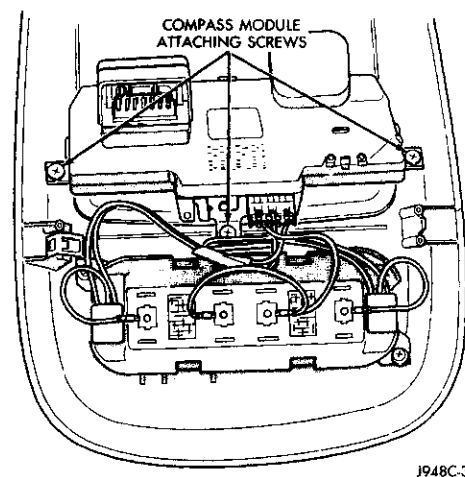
Compass/Thermometer/Display Module Remove/Install
